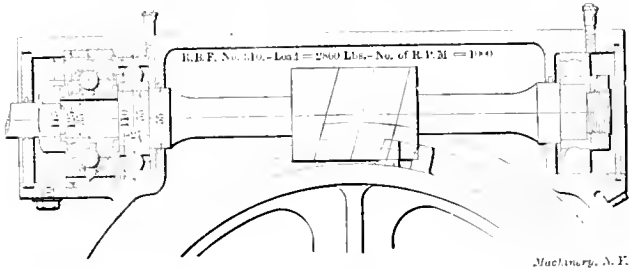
Double Thrust Bearing applied to a Worm Shaft
